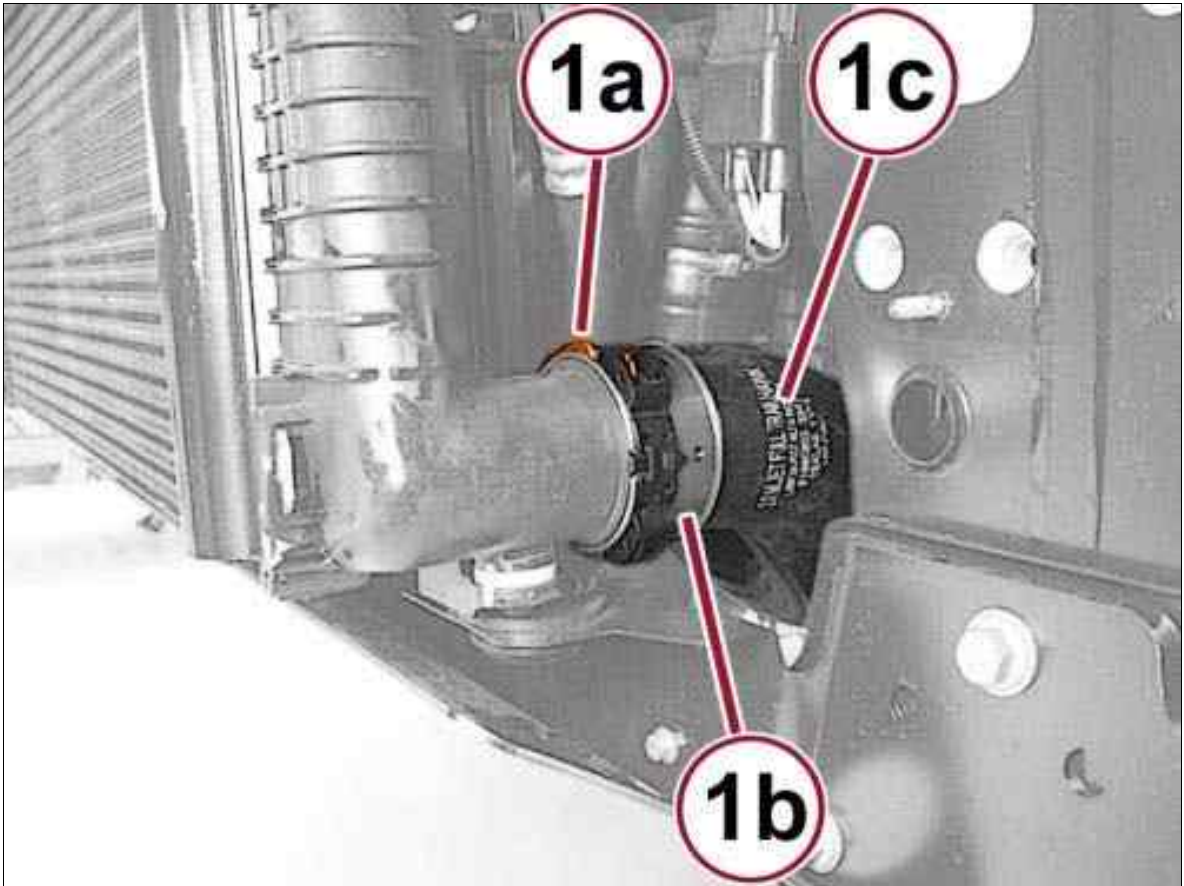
Hose, Pipe, Clamp, Quick Coupling & Spring Retainer
